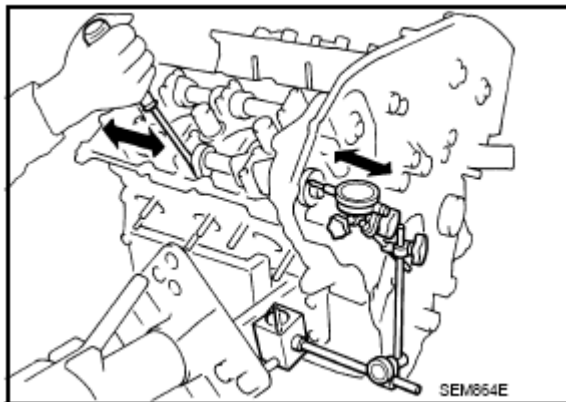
Measuring Camshaft End Play Using Dial Indicator
